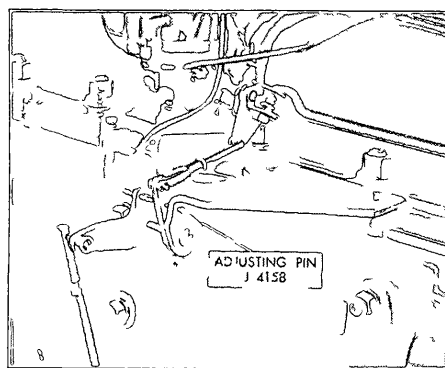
Adjusting pin installed in upper throttle valve bell crank
